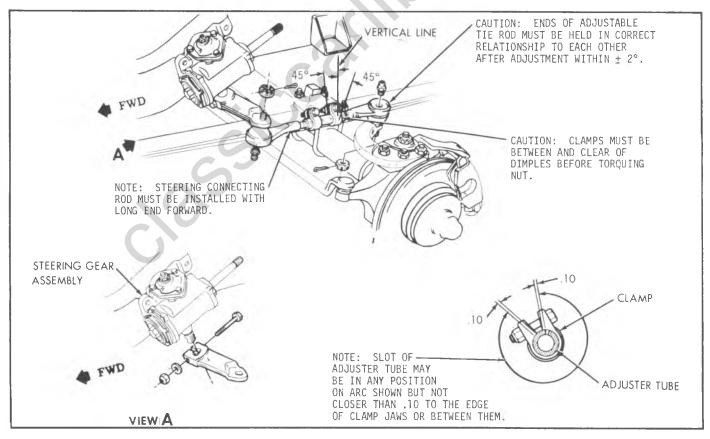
Adjustable Connecting Rod Assembly—K Series
